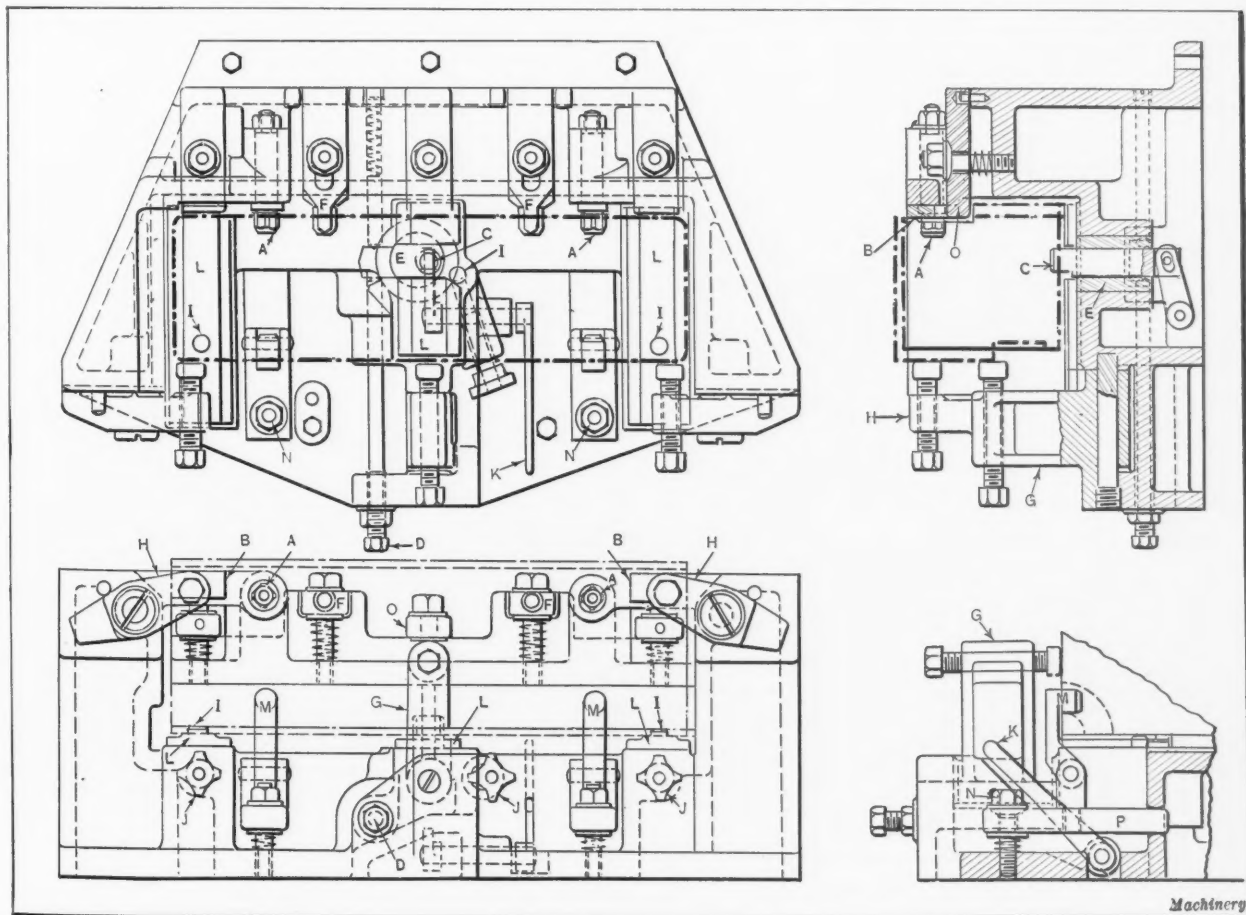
Details of Fixture used in milling the Top and Bottom Sides of the Cylinder Block
